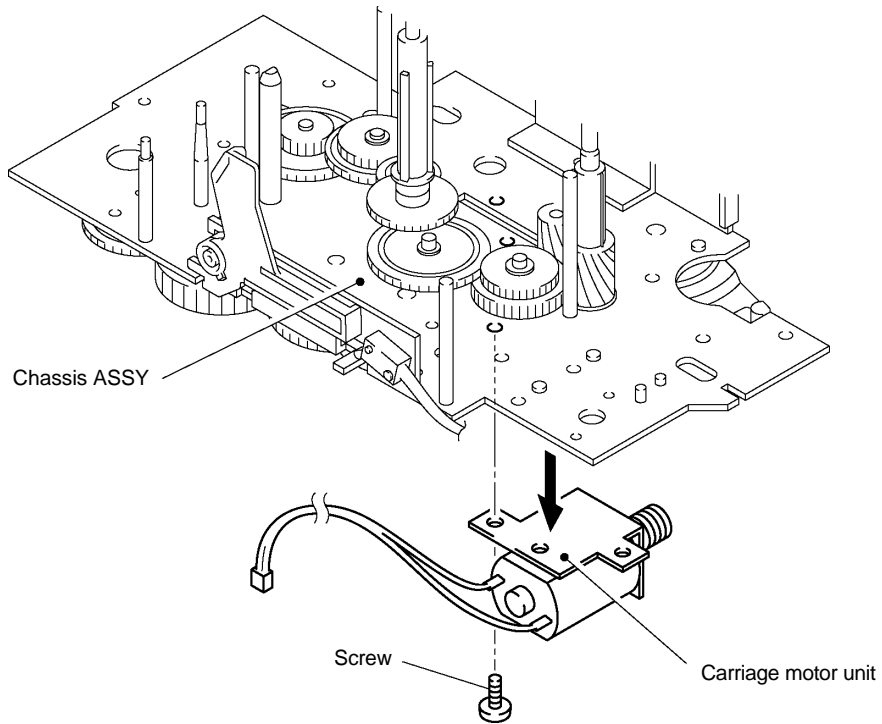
Removing the Carriage Motor ASSY (1)
